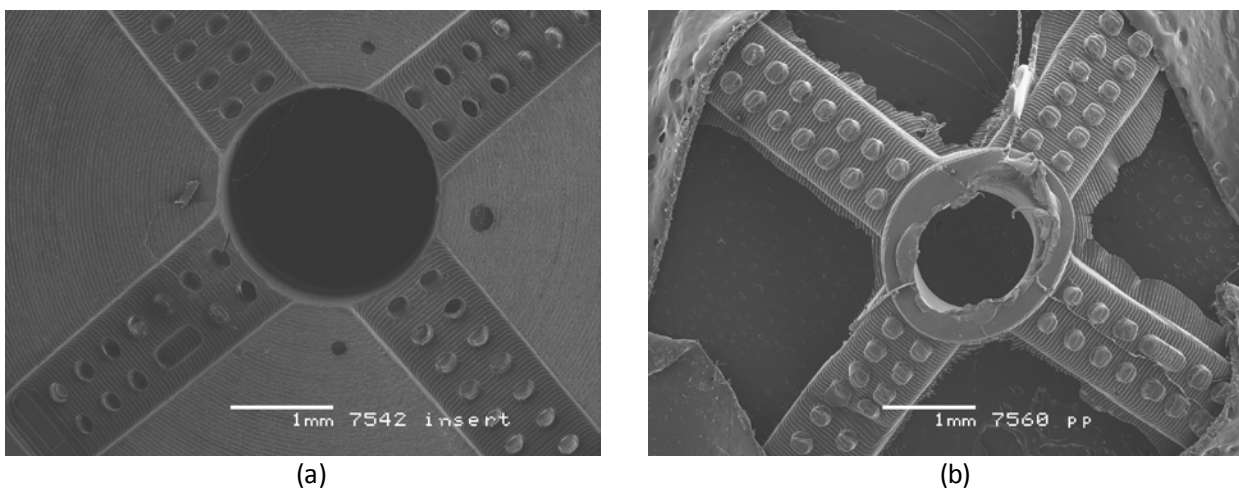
(a) The insert produced by additive manufacturing (b) is the polymer parts produced by injection moulding using the AMed inserts.
